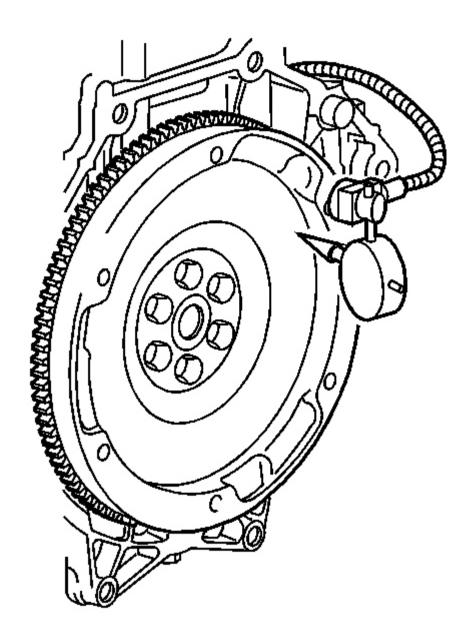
Measuring Flywheel Runout Courtesy of GENERAL MOTORS CORP.
